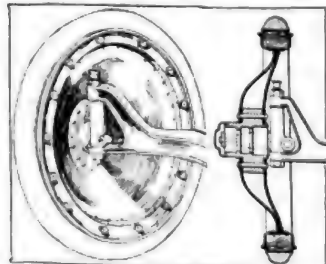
LOAFLAND CASTER FRONT WHEEL
